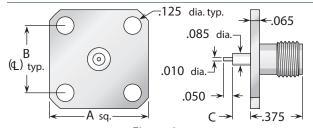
(11/16" square flange, interchangeable with BNC and TNC standard flange size)
